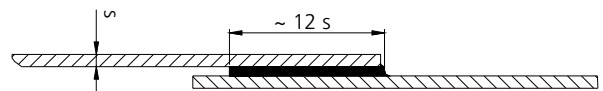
Lap joint with lap weld (for liners with a thickness of up to 3.5 mm)
